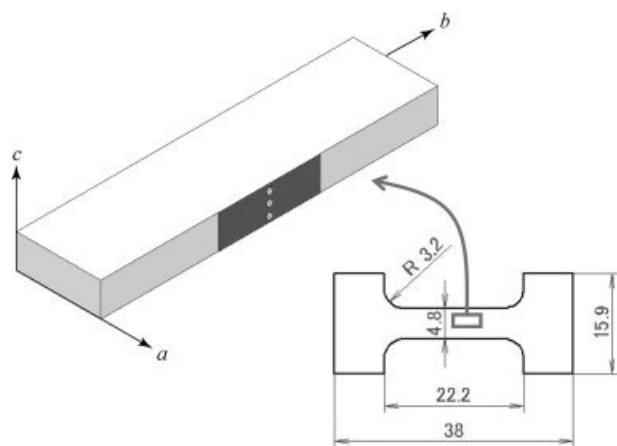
ASTM tensile test specimen and cutting location of thin specimen.
